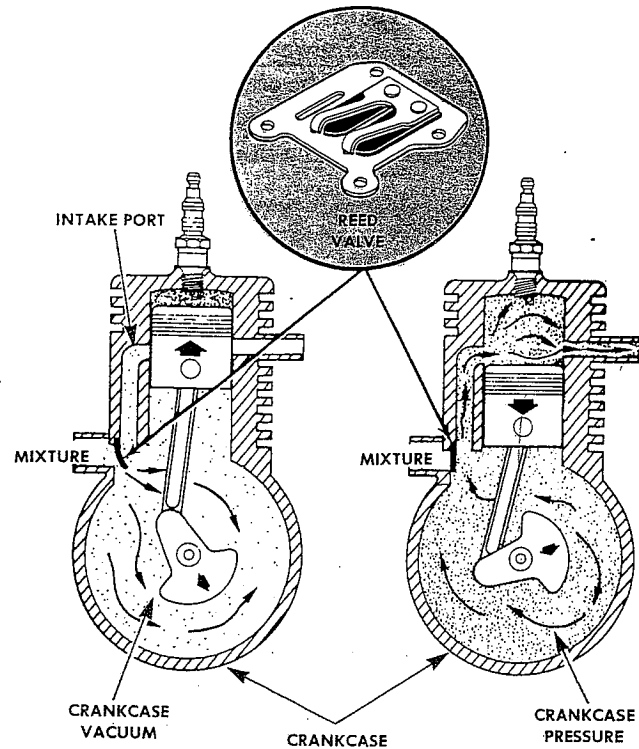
A reed valve is opened by crankcase vacuum and closed by crankcase pressure. (McCulloch Corp.)
